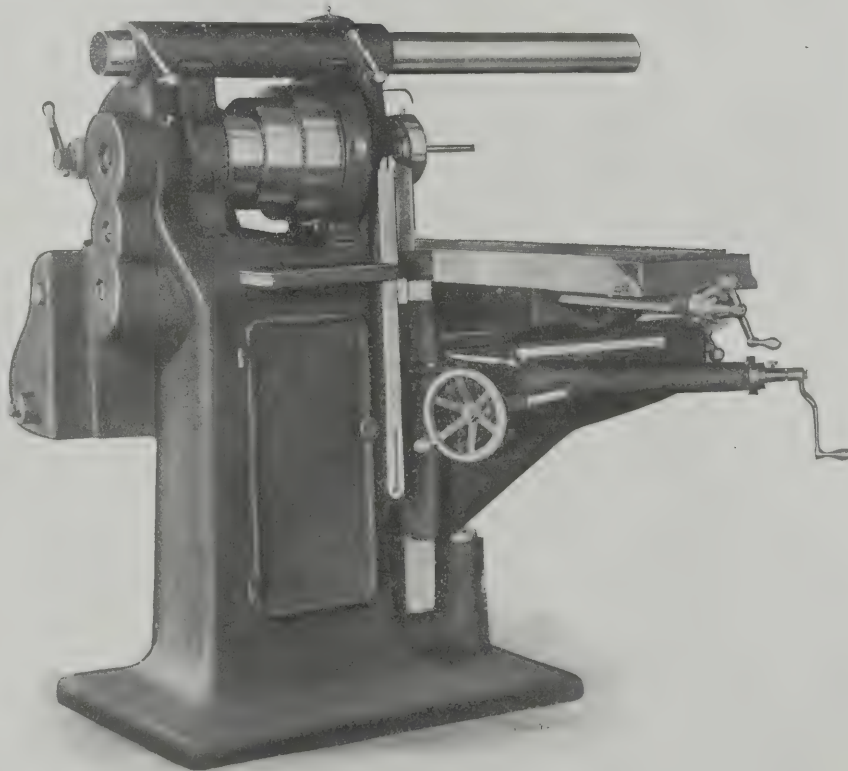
Side View, showing Arrangement of Adjusting Handwheels and Cranks
